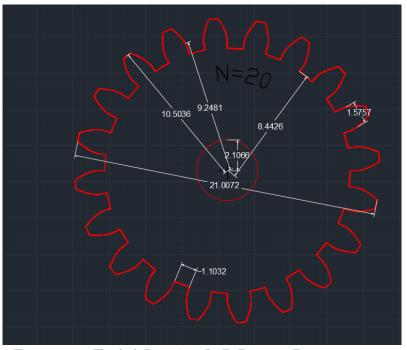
20 Toothed Gear AutoCAD Drawing, Dimensions in mm
